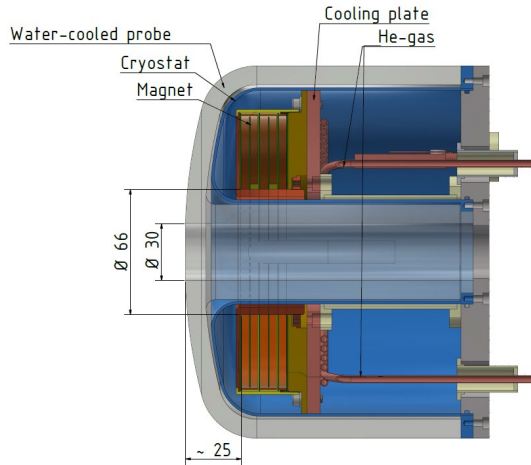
CAD design of MEESSST magnet mounted in cryostat and plasma probe. All dimensions are in mm.
